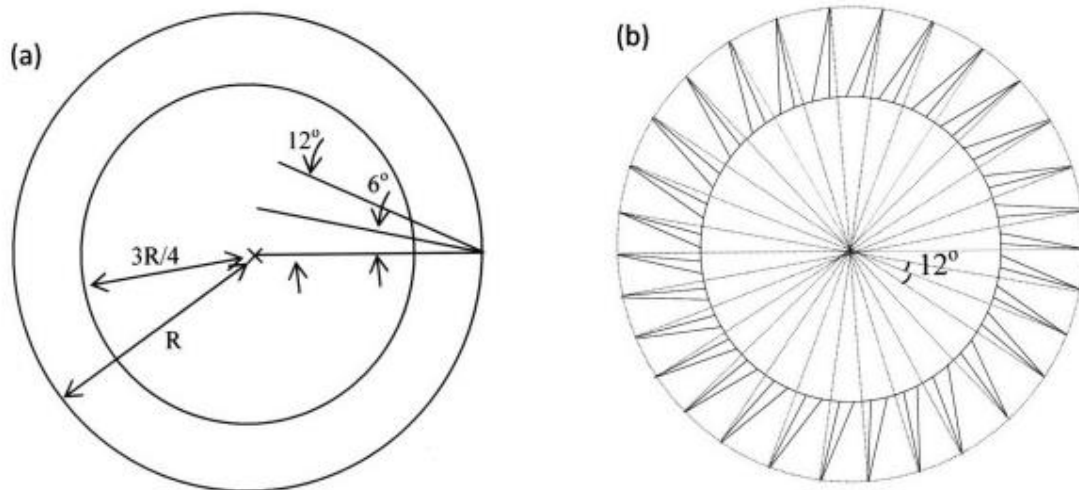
Construction lines used to draw the escape wheel teeth. (Hill F. A., 2008)
